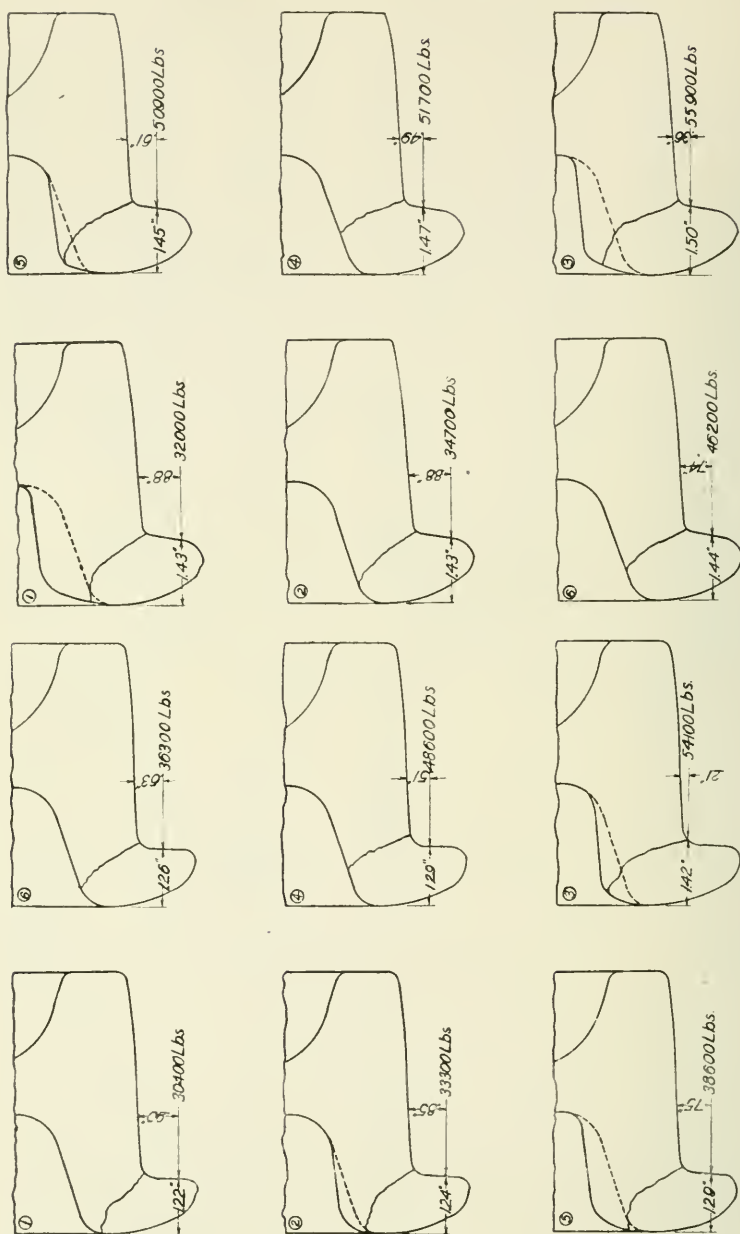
740-LB. ARCH PLATE WHEEL No. 04836.
